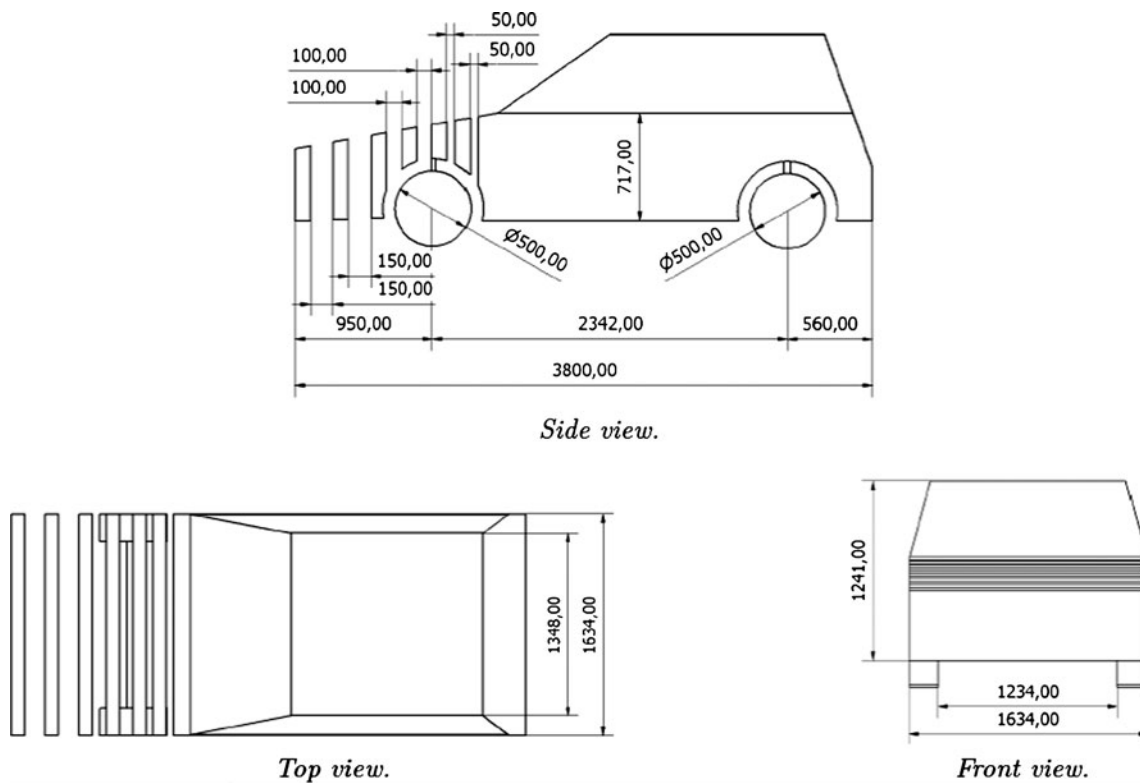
Overall dimensions of the virtual vehicle given in millimeter
